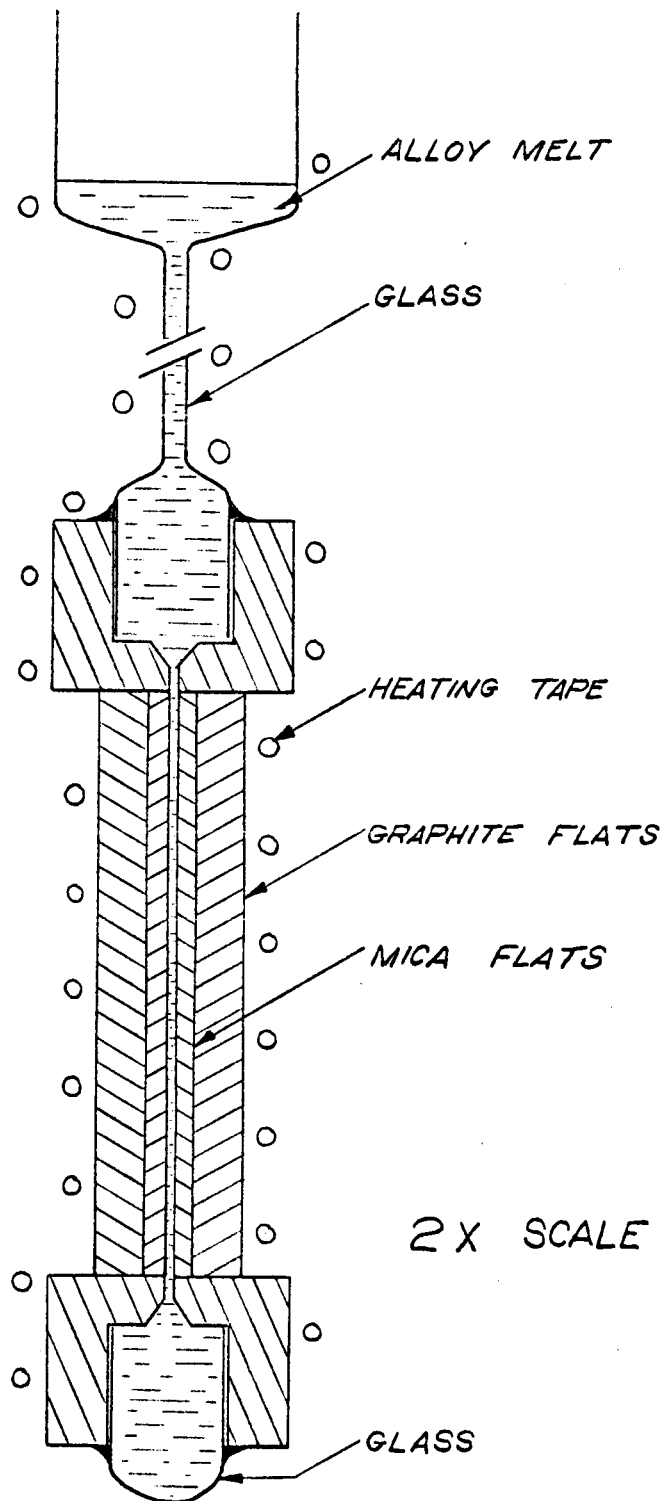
MOLD FOR IN-SN ALLOY SPECIMENS.
